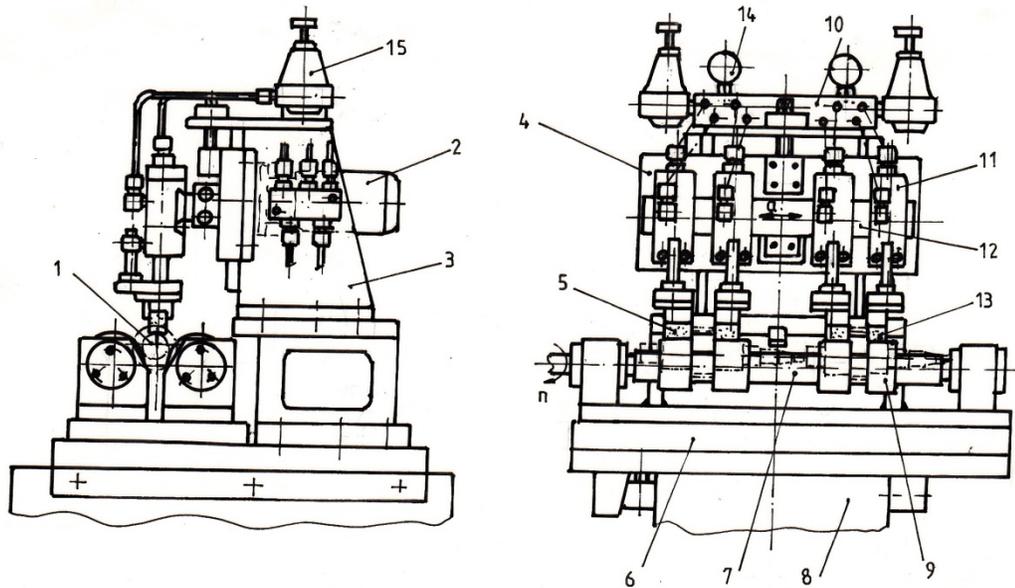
The superfinishing attachment to machining cylindrical surfaces of gear pump pinions.
